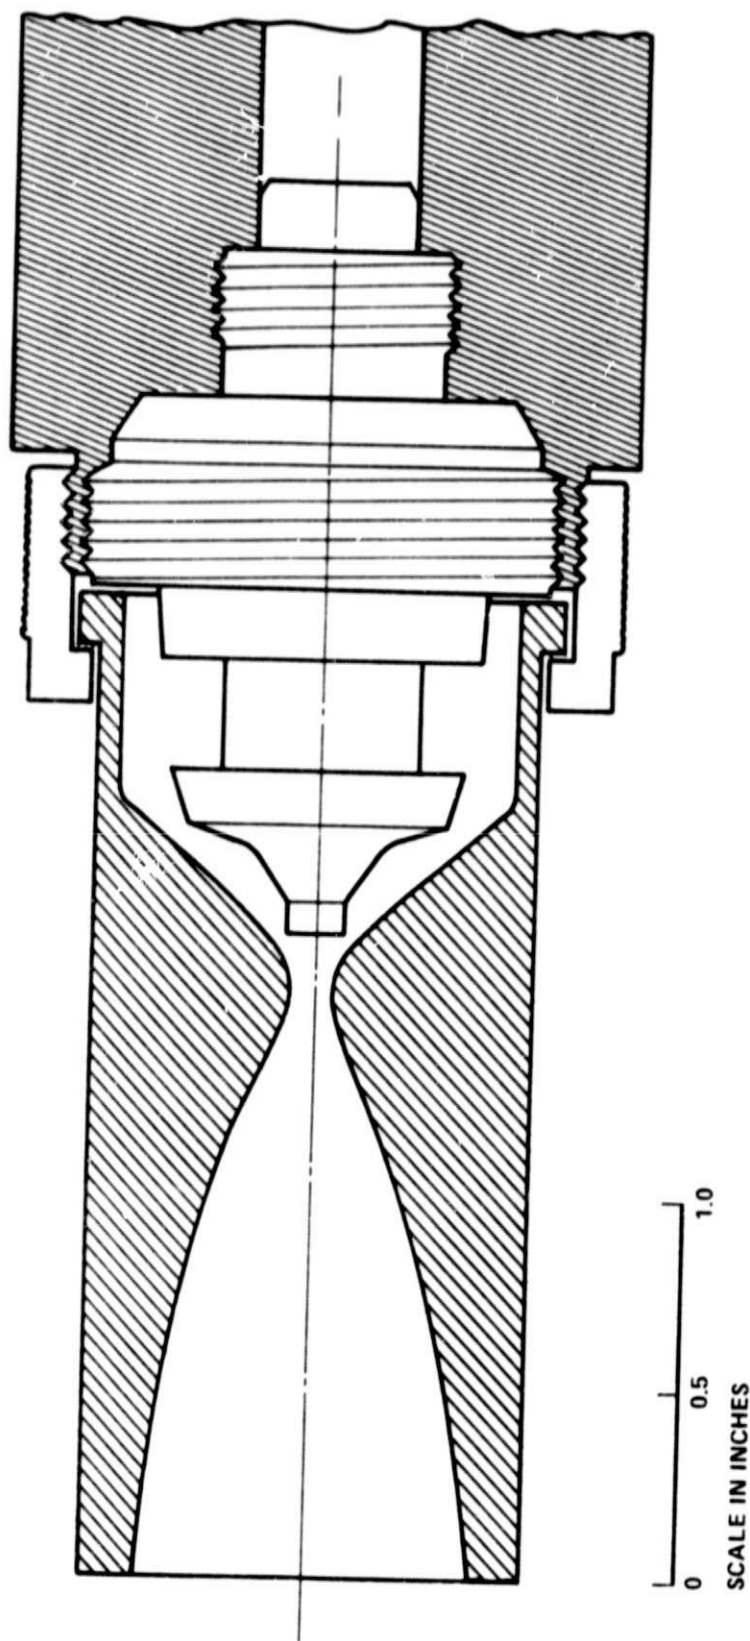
Assembly of Laval nozzle and Binks automatic spray gun.
